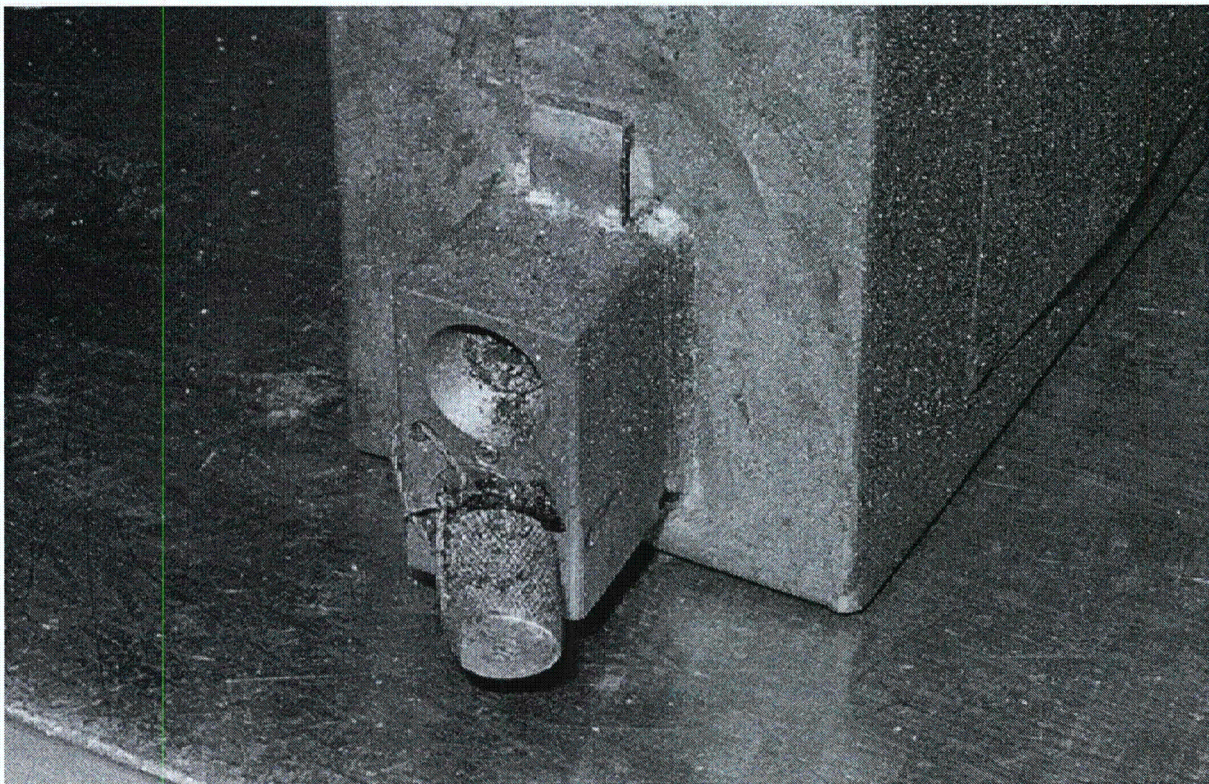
CTU-3 Post-Test Disassembly: Damaged Lock Box Dust Cap
